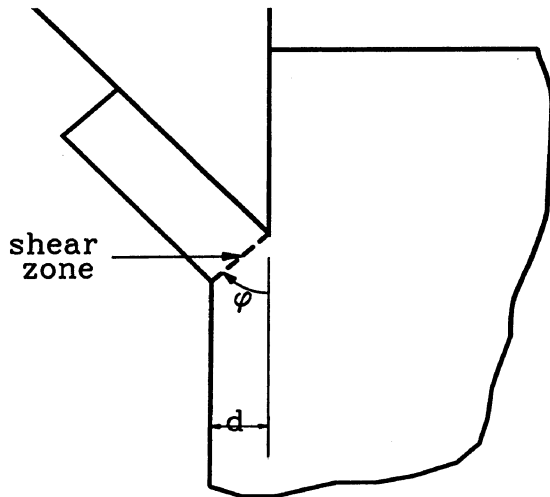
Geometry of a specimen and the cutting tool during steady state shear
